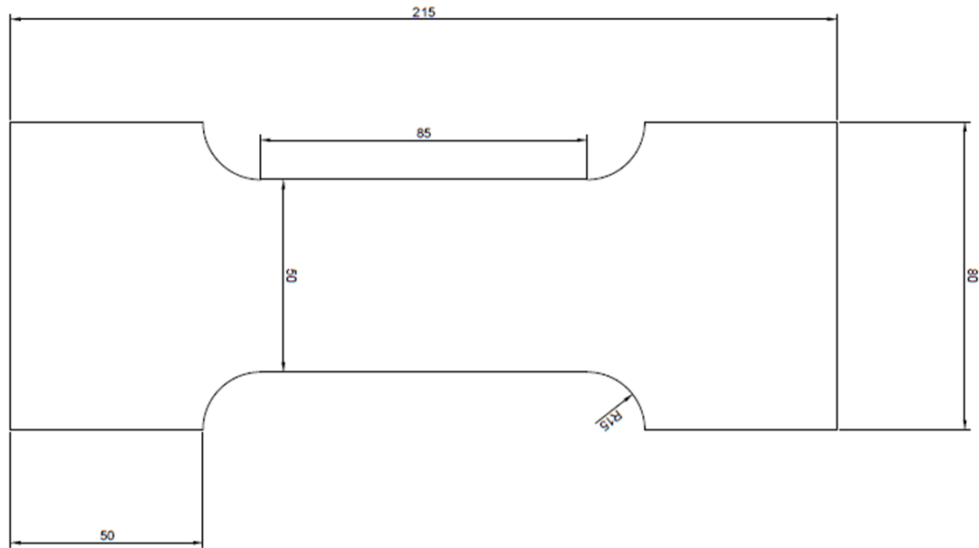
Dimensions of the large dog-bone tensile test sample (image courtesy of Dongchen Hu)
